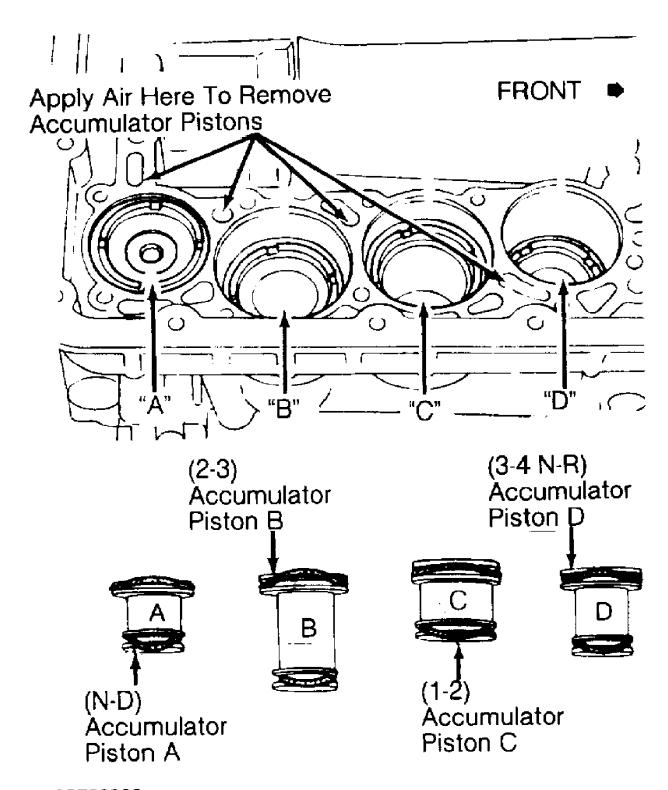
Locating & Removing Accumulator Pistons Courtesy of Nissan Motor Co., U.S.A.
